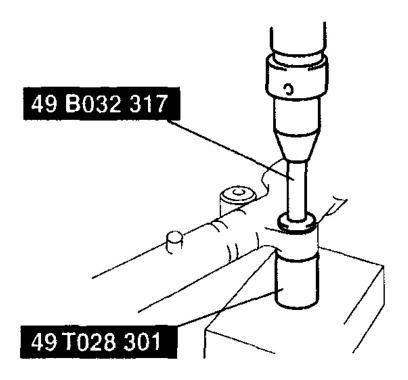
Disassembling Oil Seal (Gear Housing Side) Courtesy of MAZDA MOTORS CORP.
